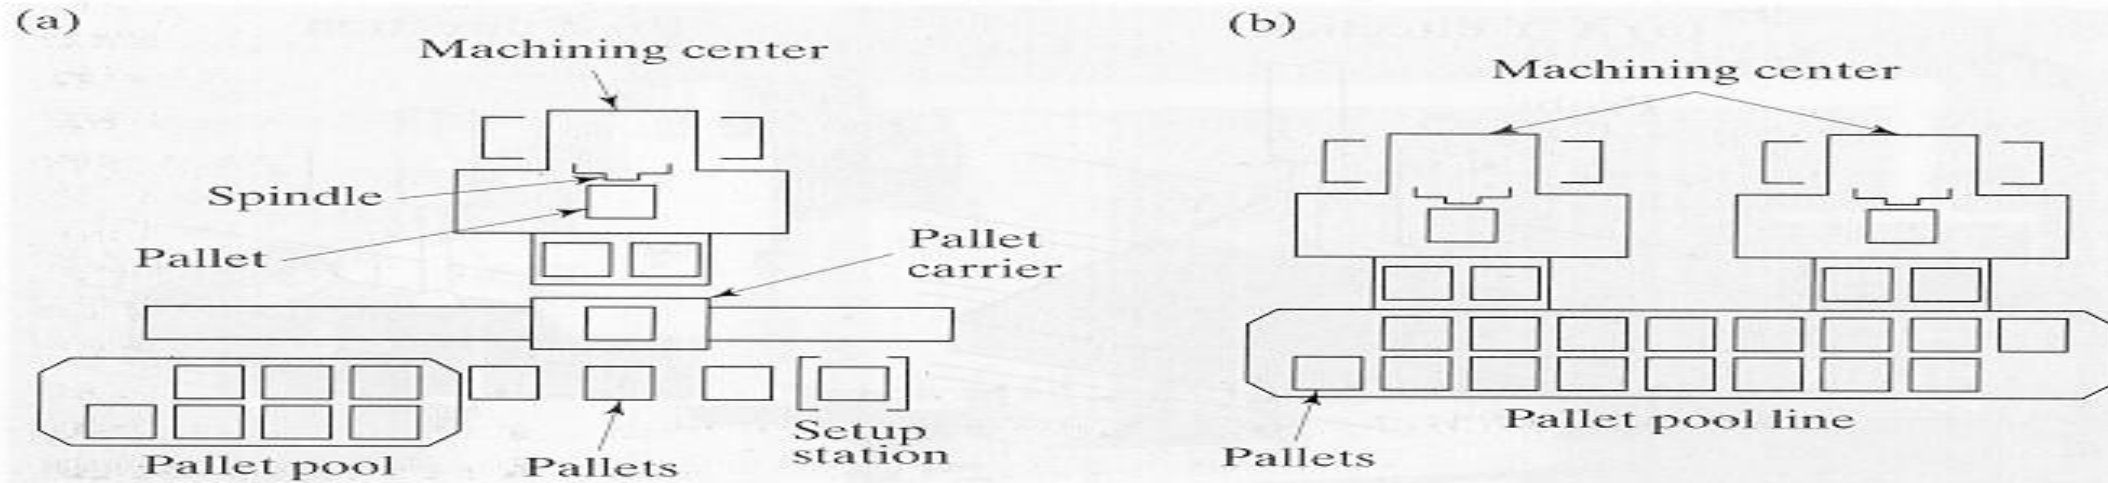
(a) Schematic illustration of the top view of a horizontal-spindle machining center showing the pallet pool, set-up station for a pallet, pallet carrier, and an active pallet in operation (shown directly below the spindle of the machine). (b) Schematic illustration of two machining centers with a common pallet pool. Various other arrangements are possible in such systems. *Source:* Hitachi Seiki Co., Ltd.
